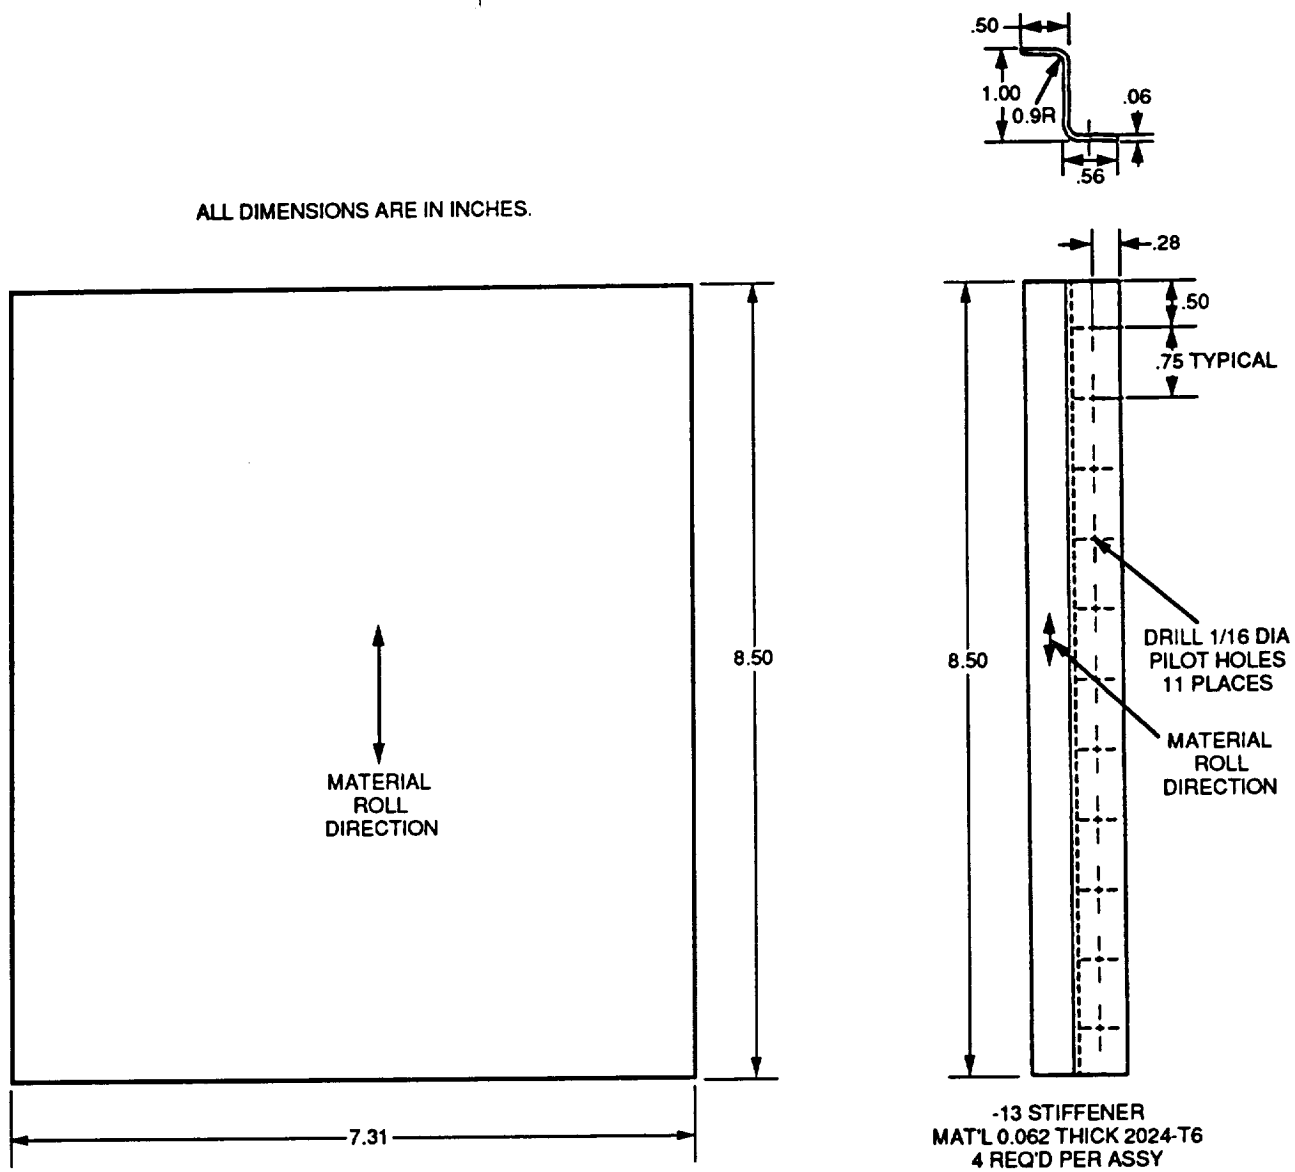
2024 Aluminum Alloy Riveted – Details (Dwg TGP-1104)
